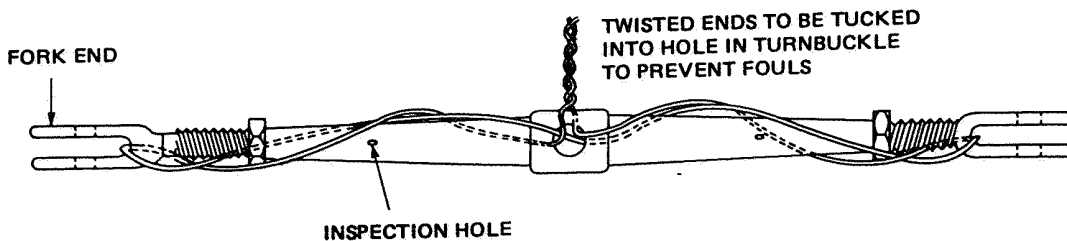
WIRE-LOCKING OF TURNBUCKLE WITH FORK END-FITTINGS
